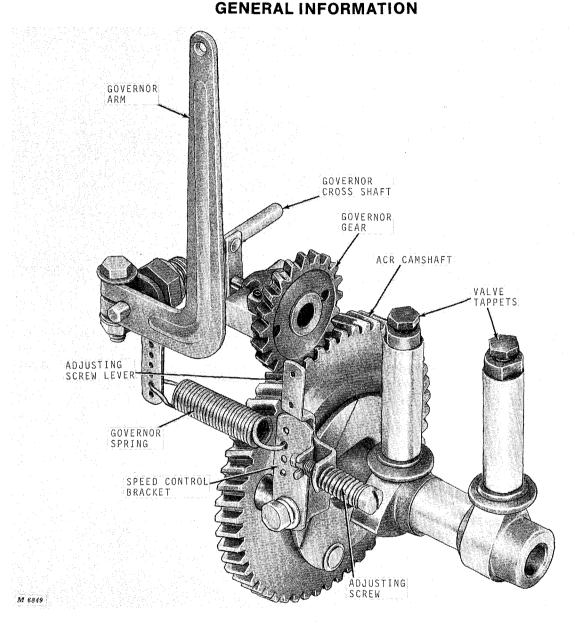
Assembled View of Camshaft, Tappets and Governor
